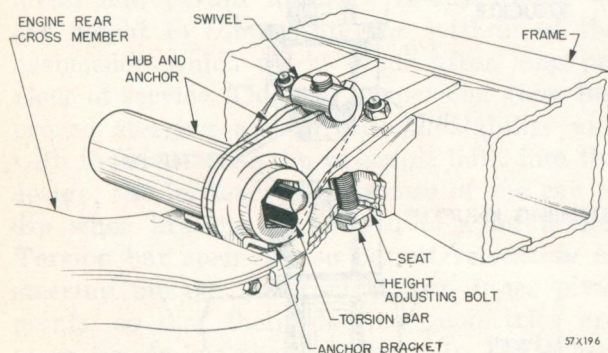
Torsion Bar Spring Cam and Height Adjustment Bolt Assembly
